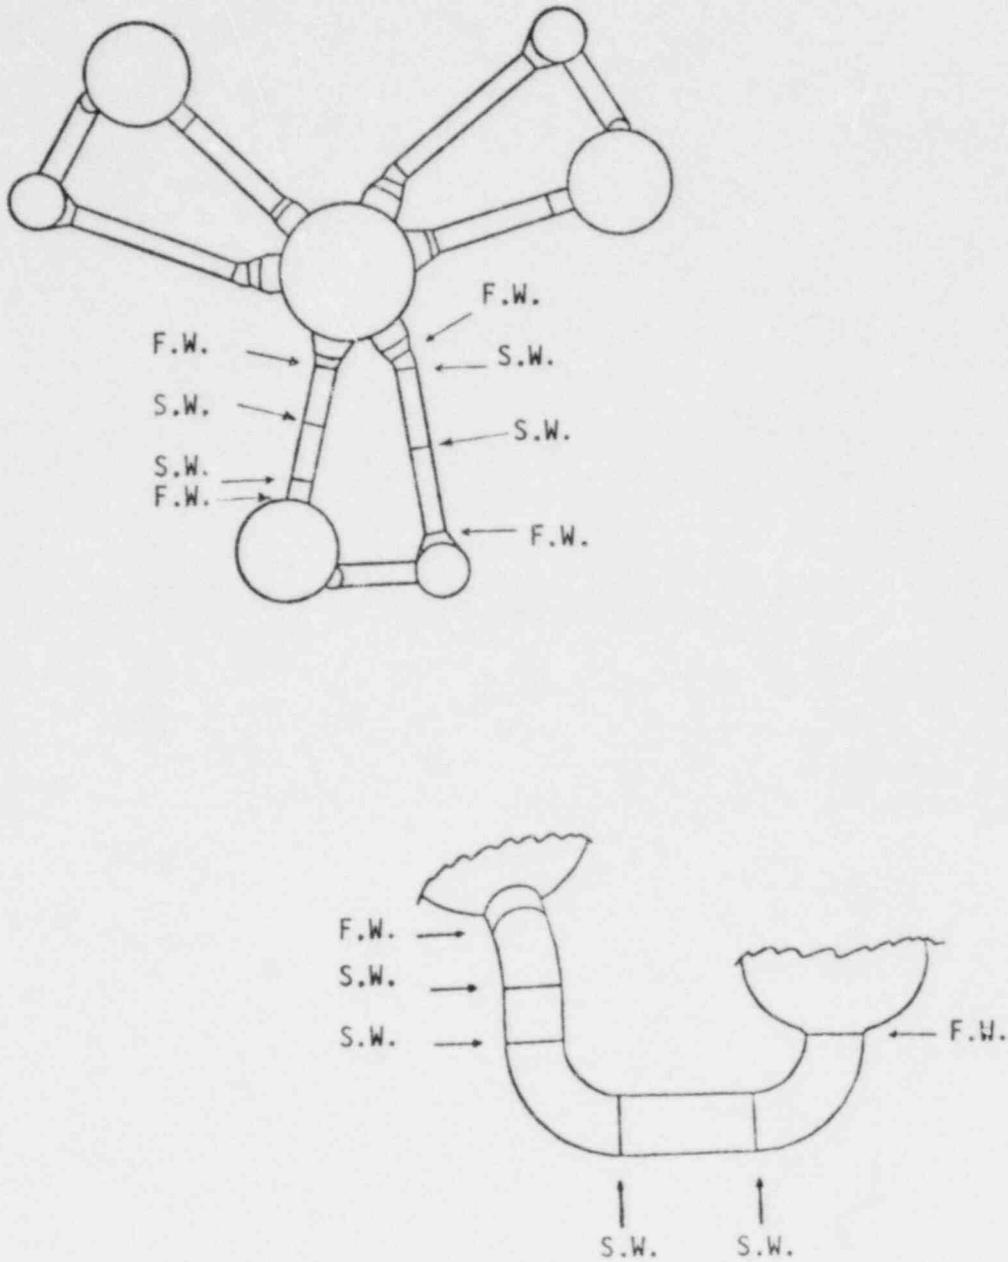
Weld location for San Onofre Unit
